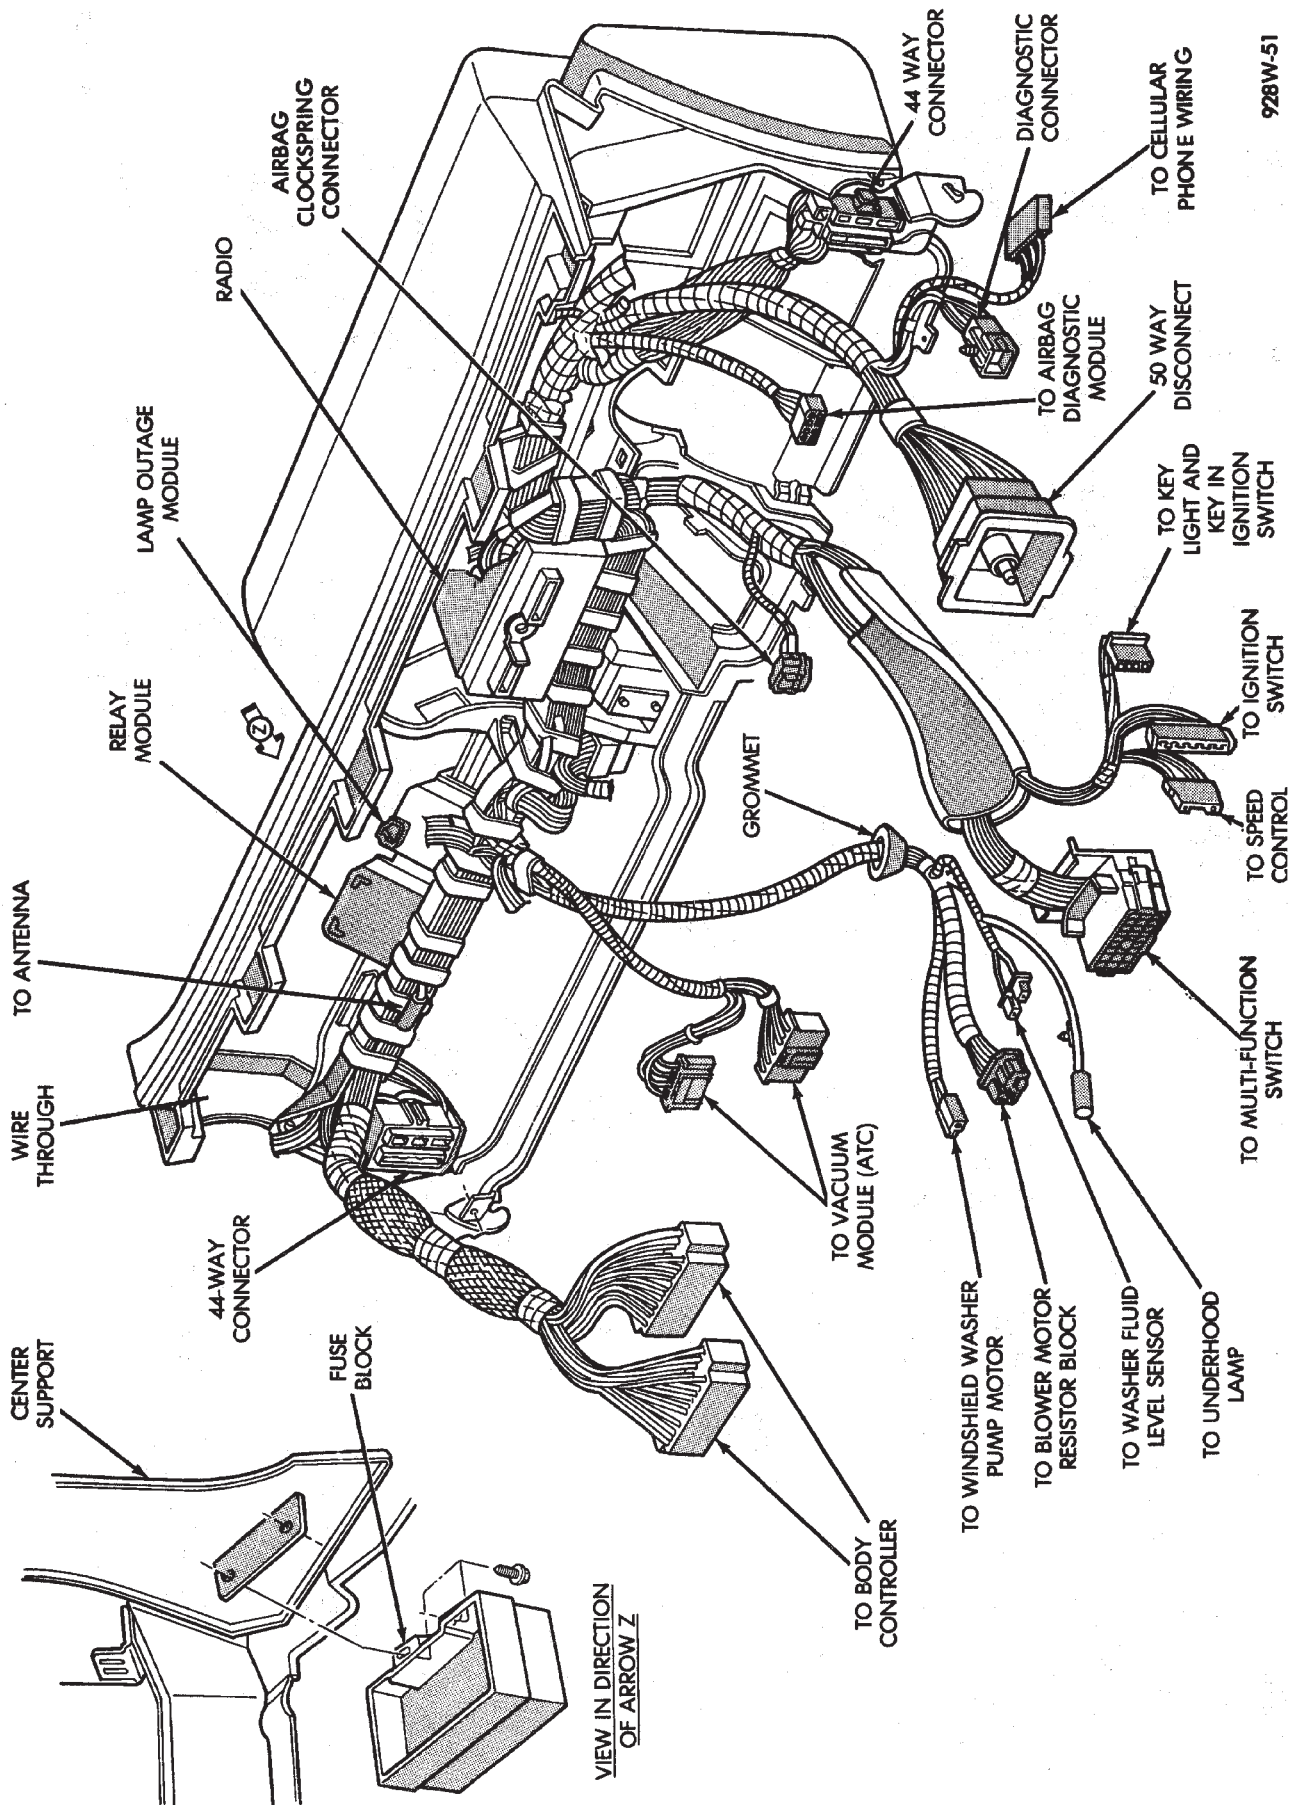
Instrument Panel Wiring (Routing) AC Body
